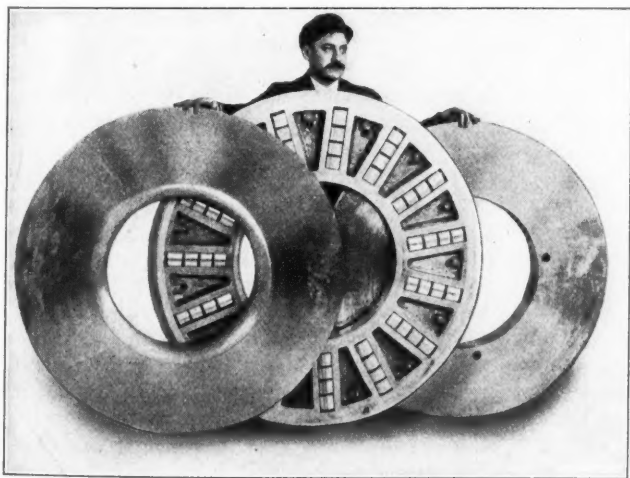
Example of Unusually Large Roller Thrust Bearing
